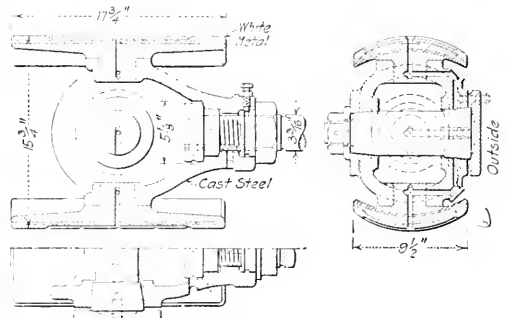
CROSSHEAD OF UNIFLOW ENGINE
